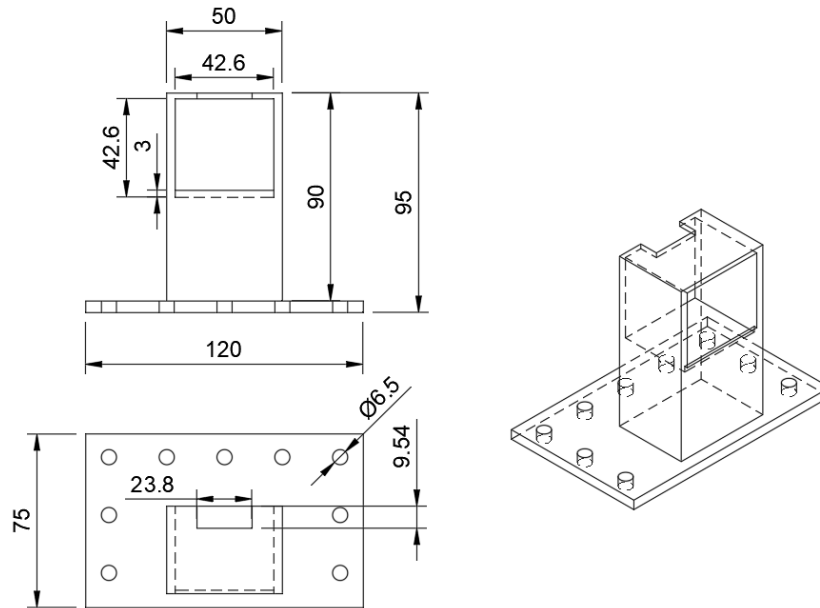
Technical drawing of motor mount used to position motors in line with the knob from the x-direction translation stage. 1/4"-20 screws are used for all mounting. All dimensions are given in millimeters.
